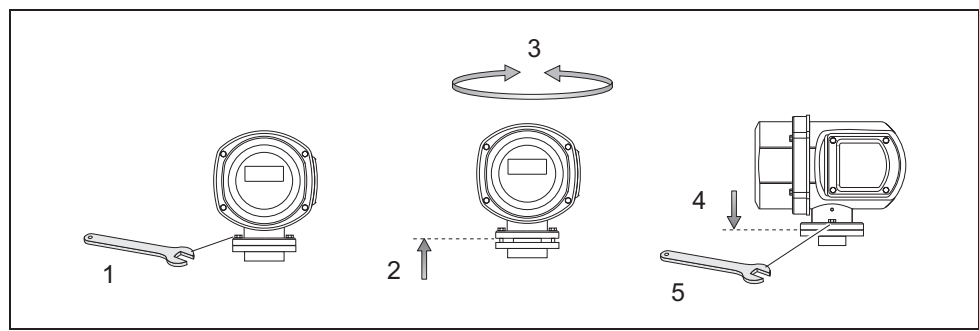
Turning the transmitter housing (stainless-steel field housing)
